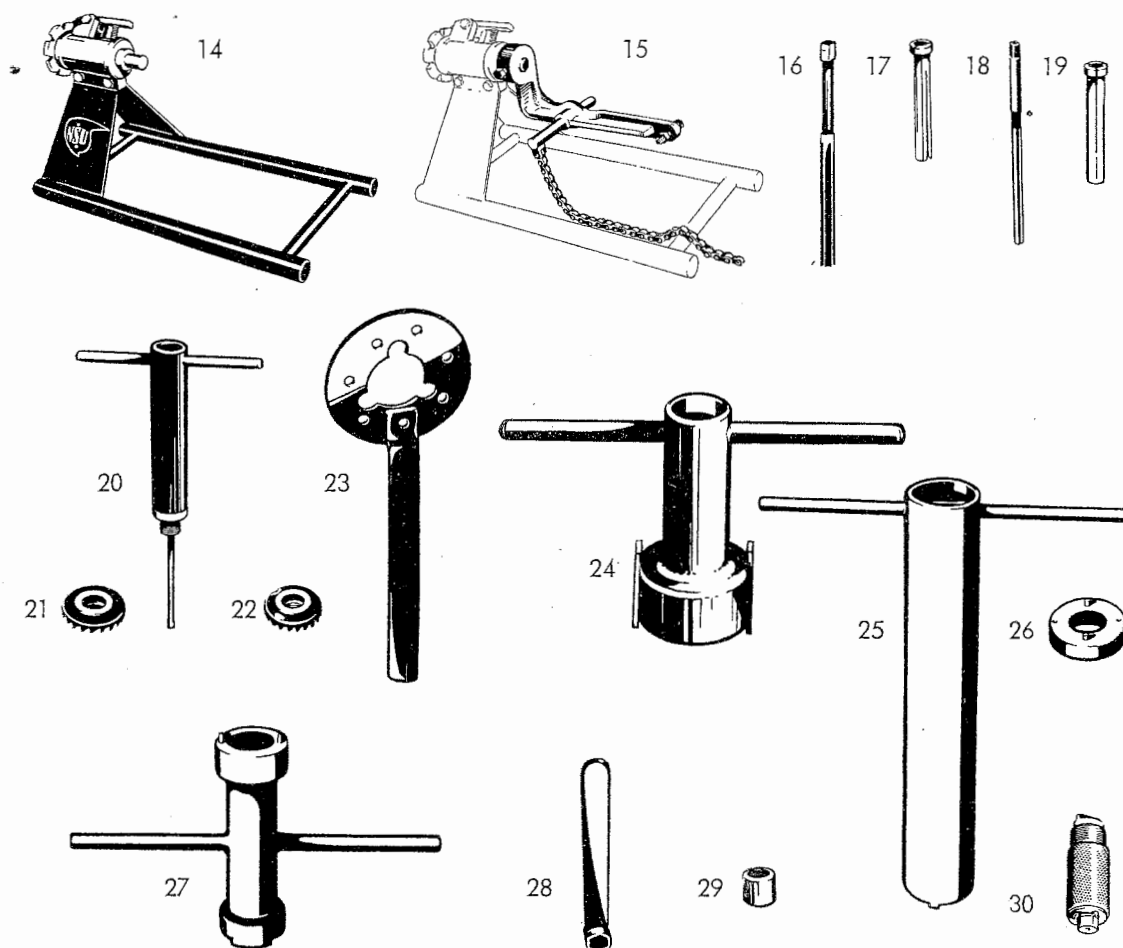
1 Assembly stand, jig	All	048 422 000
